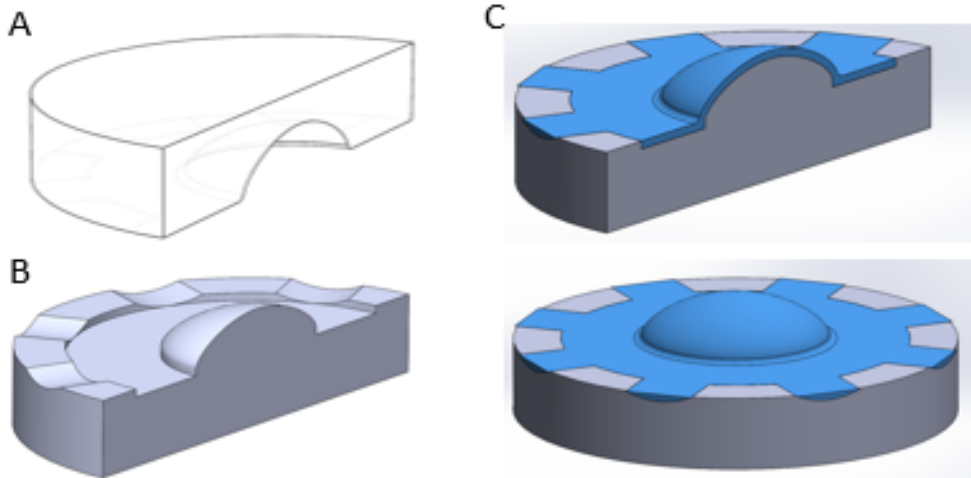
Mold design with Solid Works software with semi-lens shape. Top mold design (A); Bottom mold design (B); Bottom mold design with the semi-lens patch (C).
